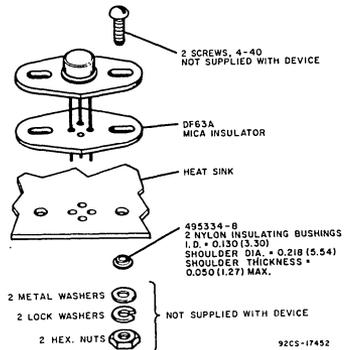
Suggested mounting hardware for JEDEC TO-5 with mounting flange.
